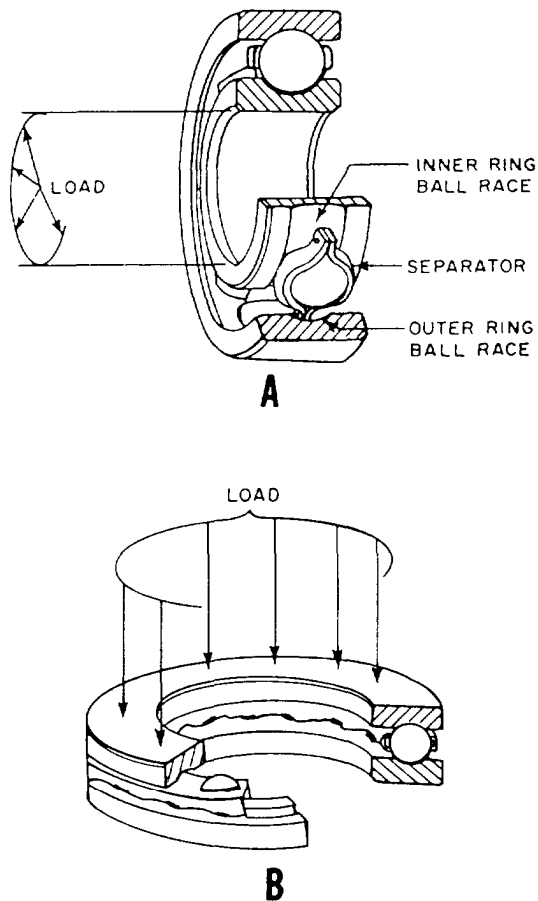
Ball bearings. A. Radial type; B. Thrust type.
